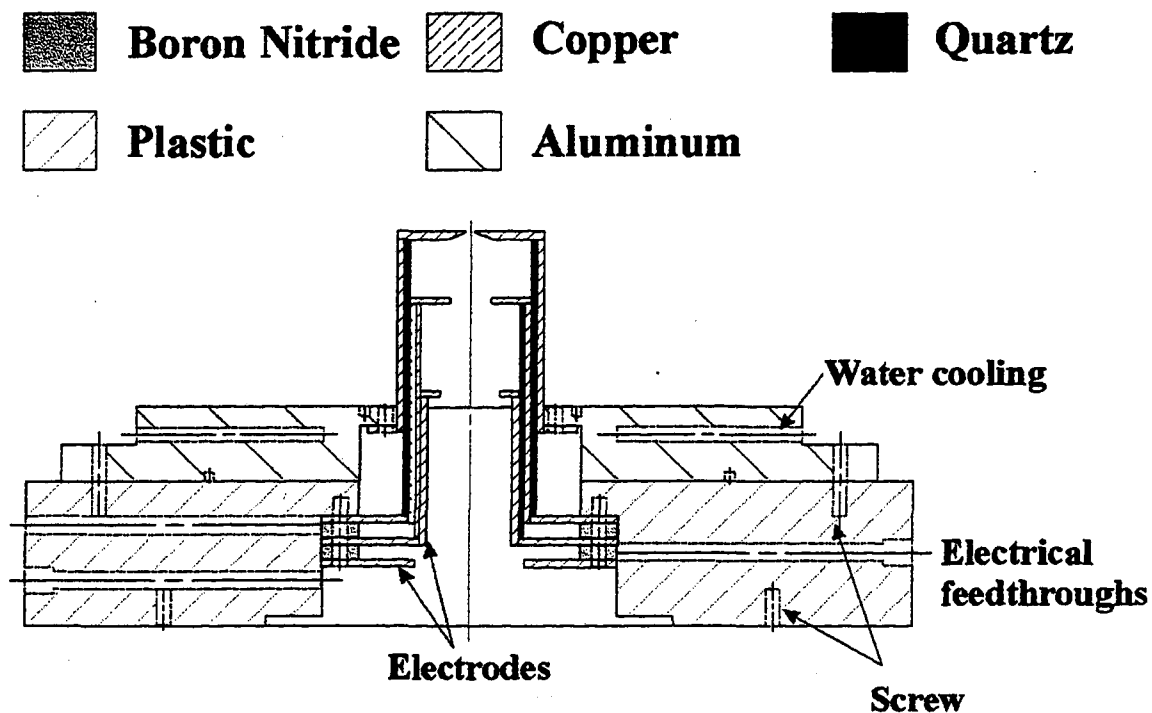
The aluminum flange is directly mounted to the front flange of the co-axial source. The first electrode is 5 cm into the source.
